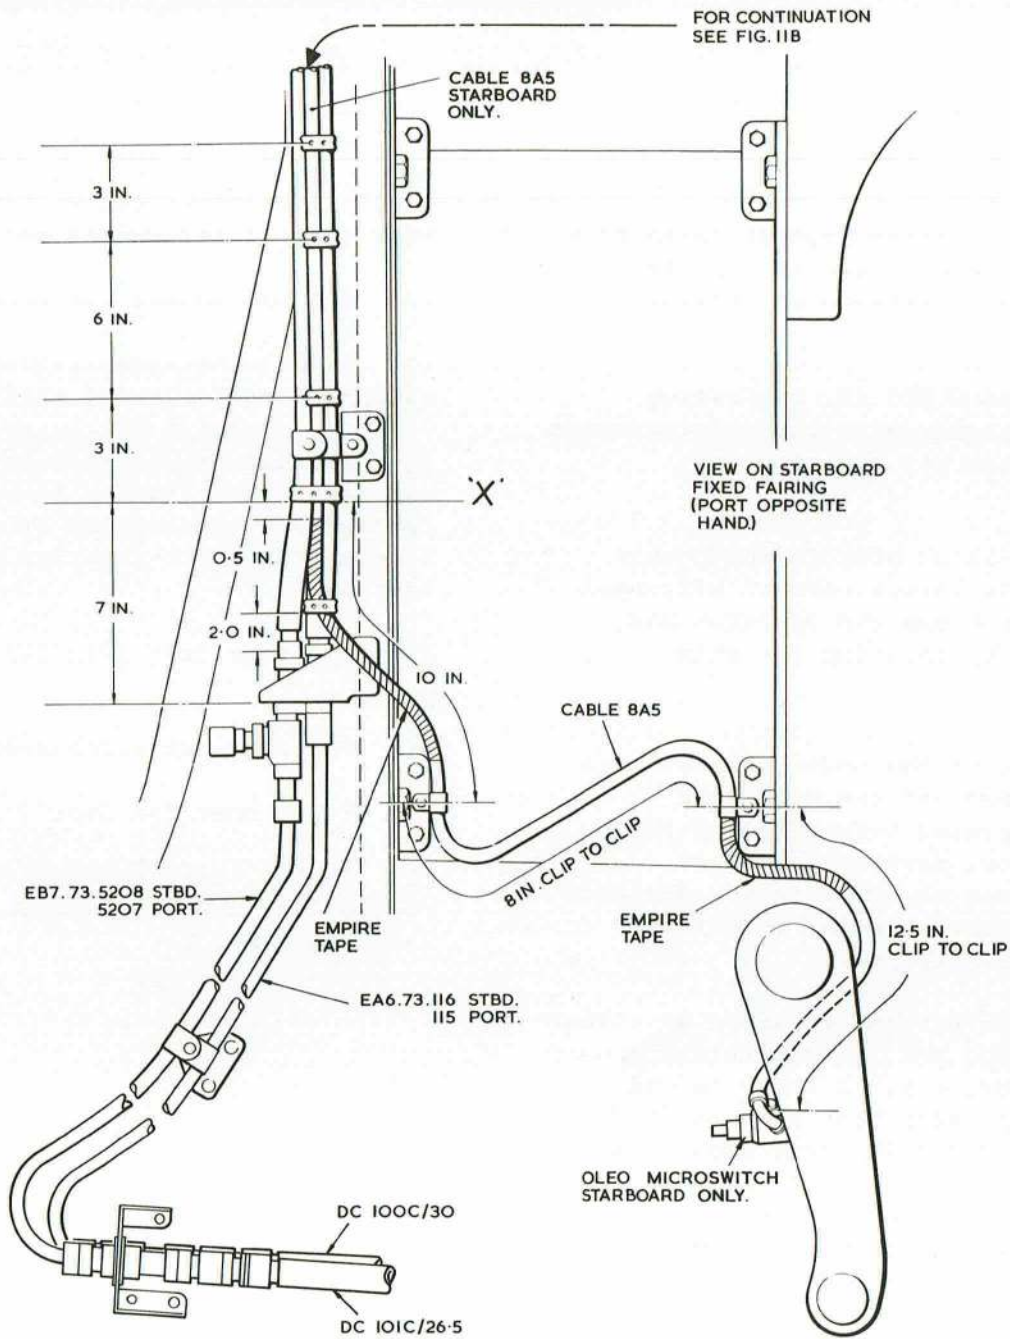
FIG. IIA. UNDERCARRIAGE - PIPING AND WIRING INSTALLATION
